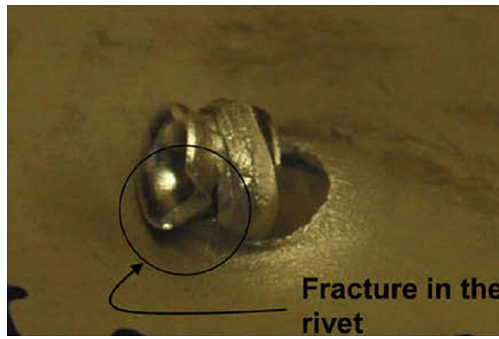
A fracture in the rivet in a joint with an aluminium alloy rivet after the pure shear test [53]
